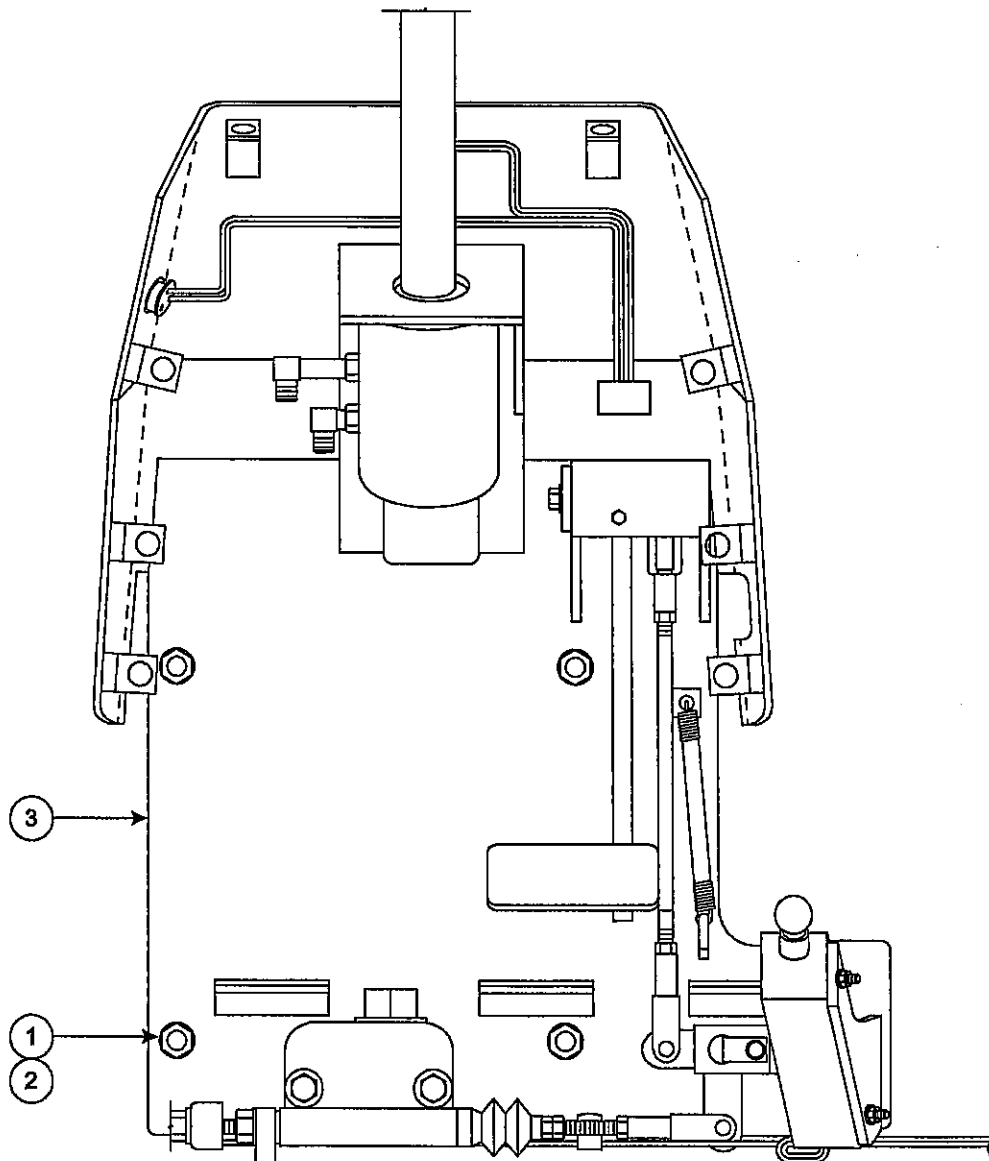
Master Cylinder Assembly, p/n: 1402557-C
